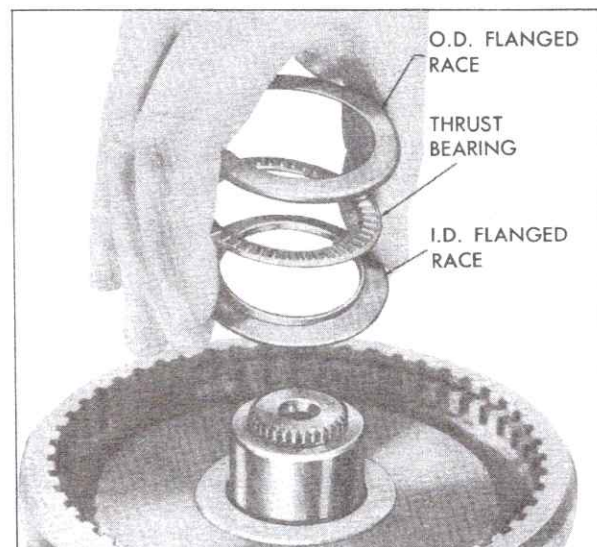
Installing Races and Thrust Bearing on Outer Face of Rear Internal Gear
